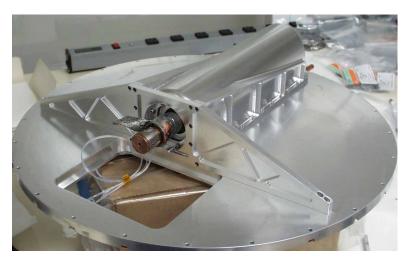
Sunpower M77B Stirling cryocooler integrated into the HESSI radiator structure.
